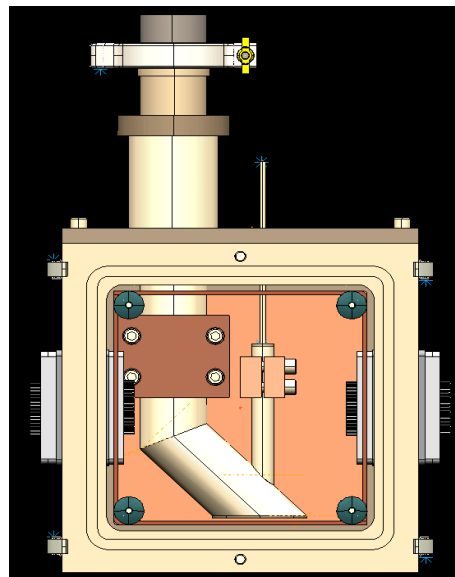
View with the CCD and cold plate removed to provide a view of the LN2 reservoir and vent
